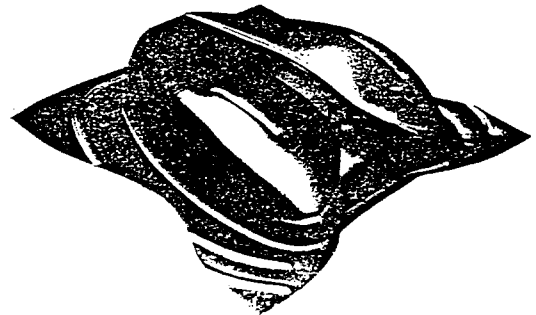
A motorcycle part obtained by counter-pressure deep drawing.
